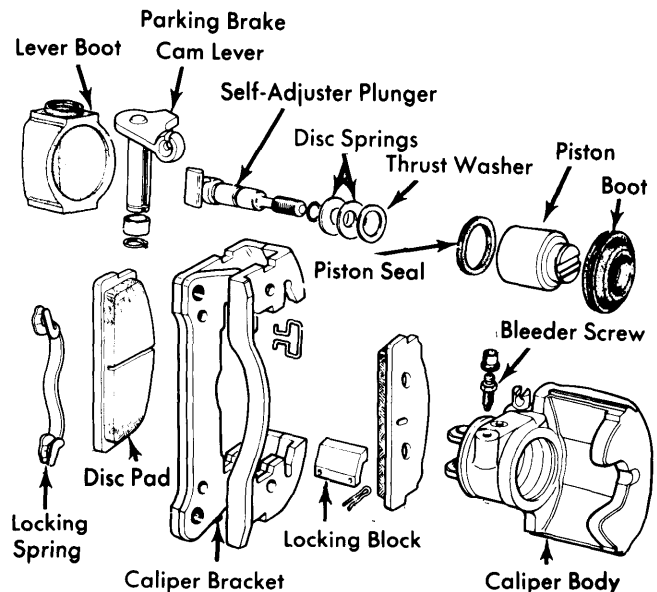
Exploded View of Rear Brake Caliper (124 Models)
